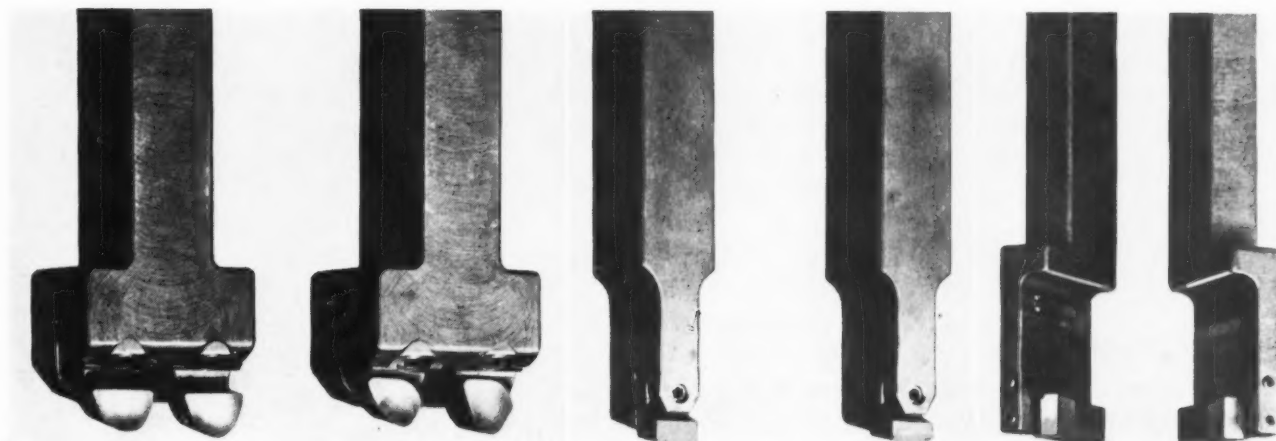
(Left) A Double-surface Planing Tool by which the Depth of the Cut can be Divided between the Tools. Fig. 2. (Center) Tools for Straight Slotting that have Made it Possible to Increase the Feed by About
